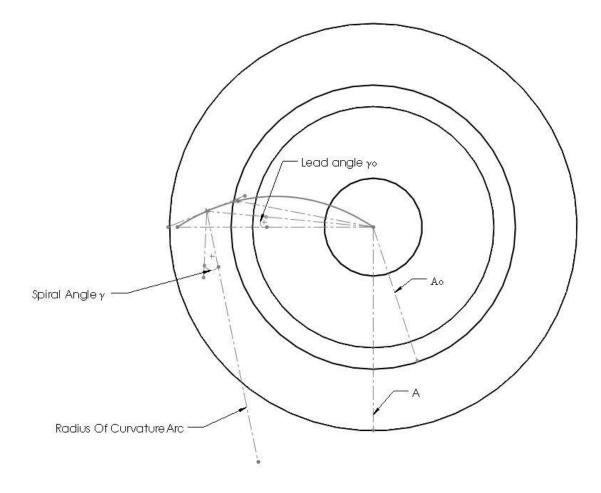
Top View of Spiral Gear with Spiral Angle Geometries
